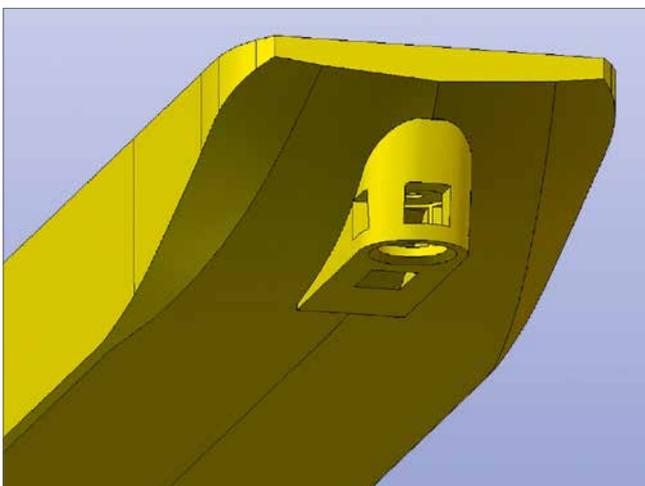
Wedge-shaped bow with bow thruster [DST]
